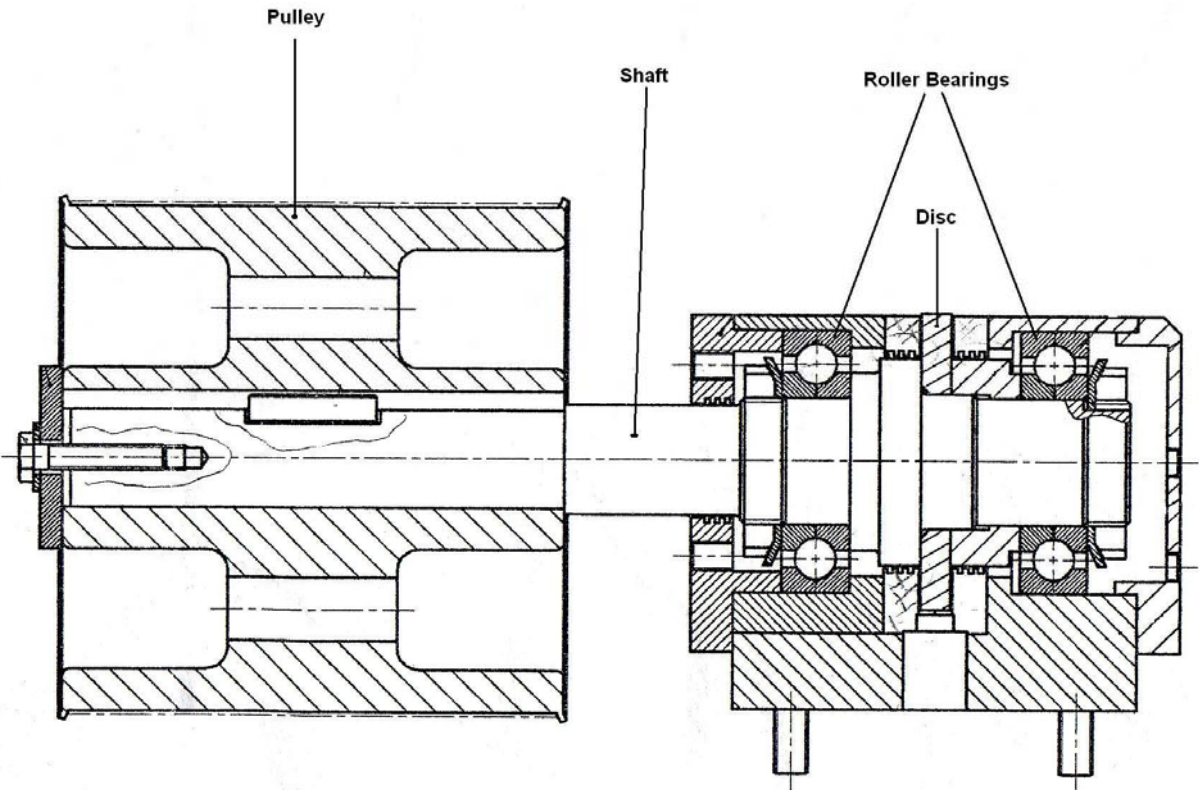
Detailed drawing of the discs box for the original twin-disc machine design.
